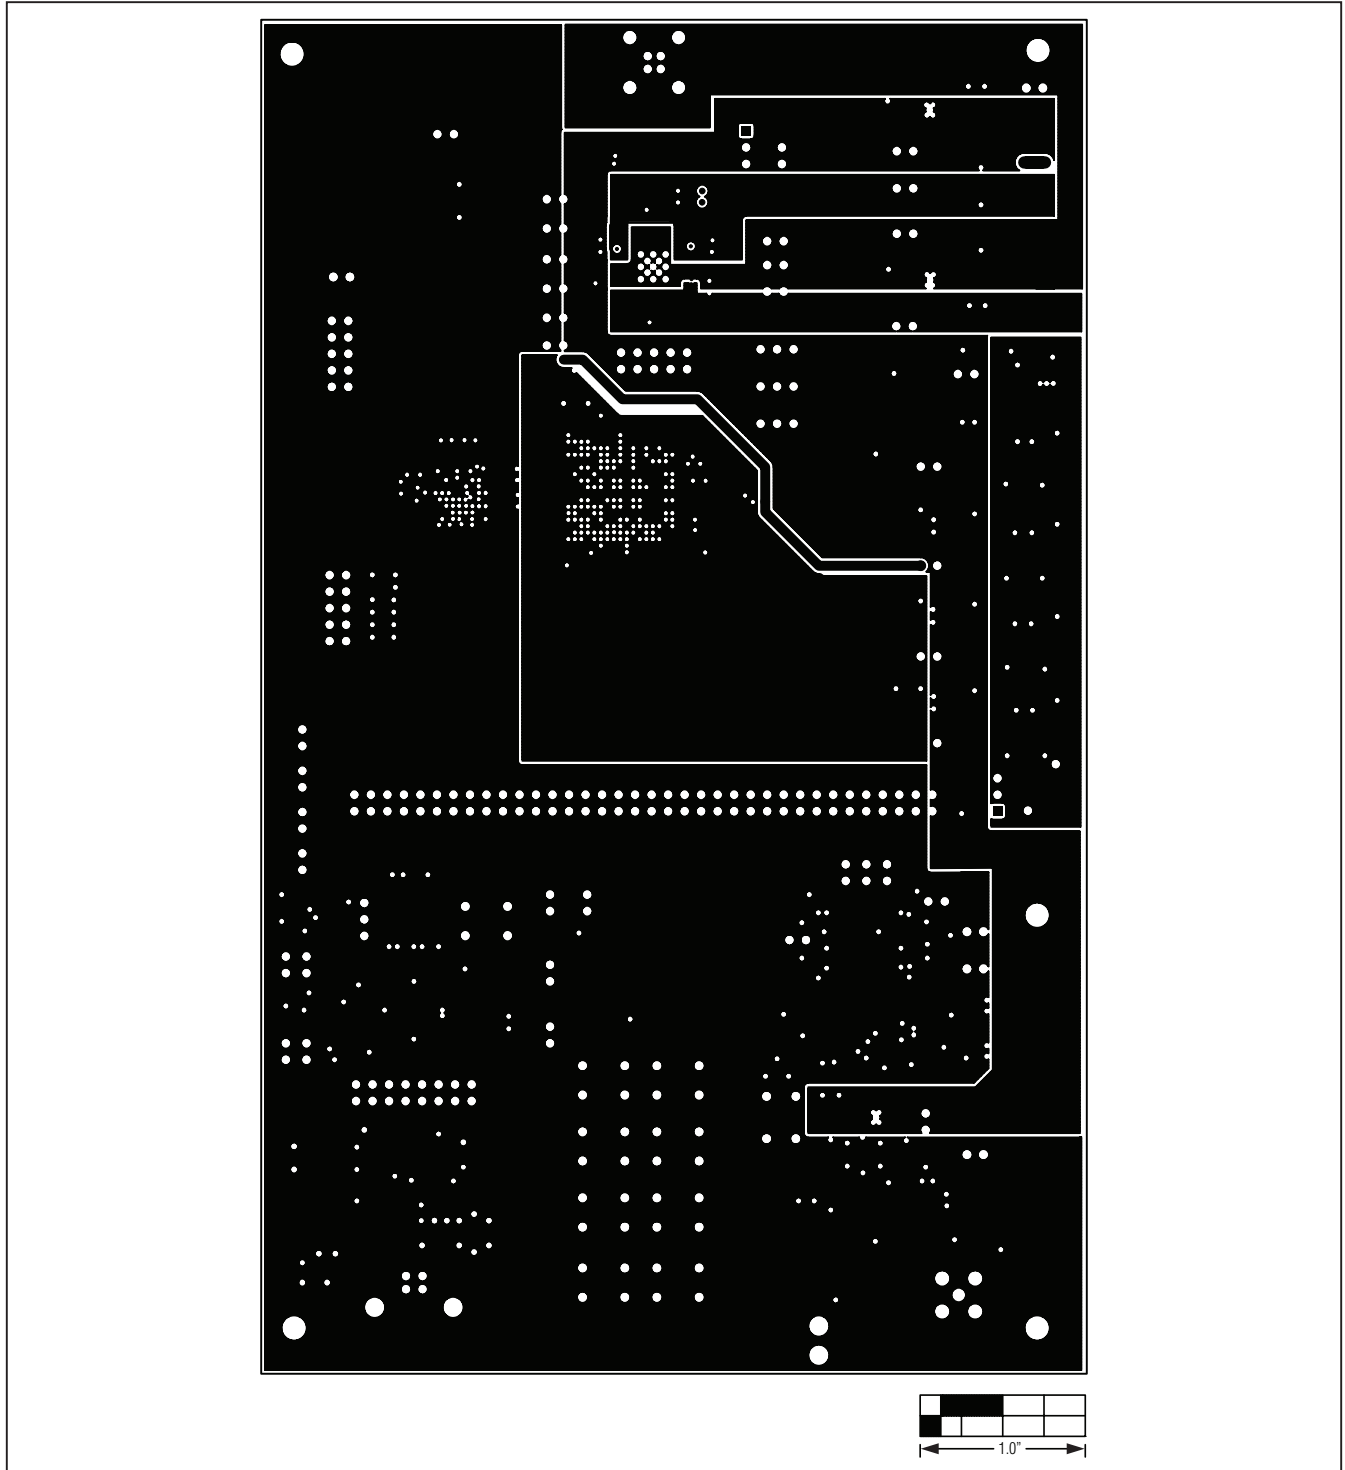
MAX9249 EV Kit PCB Layout—Power Layer 5
